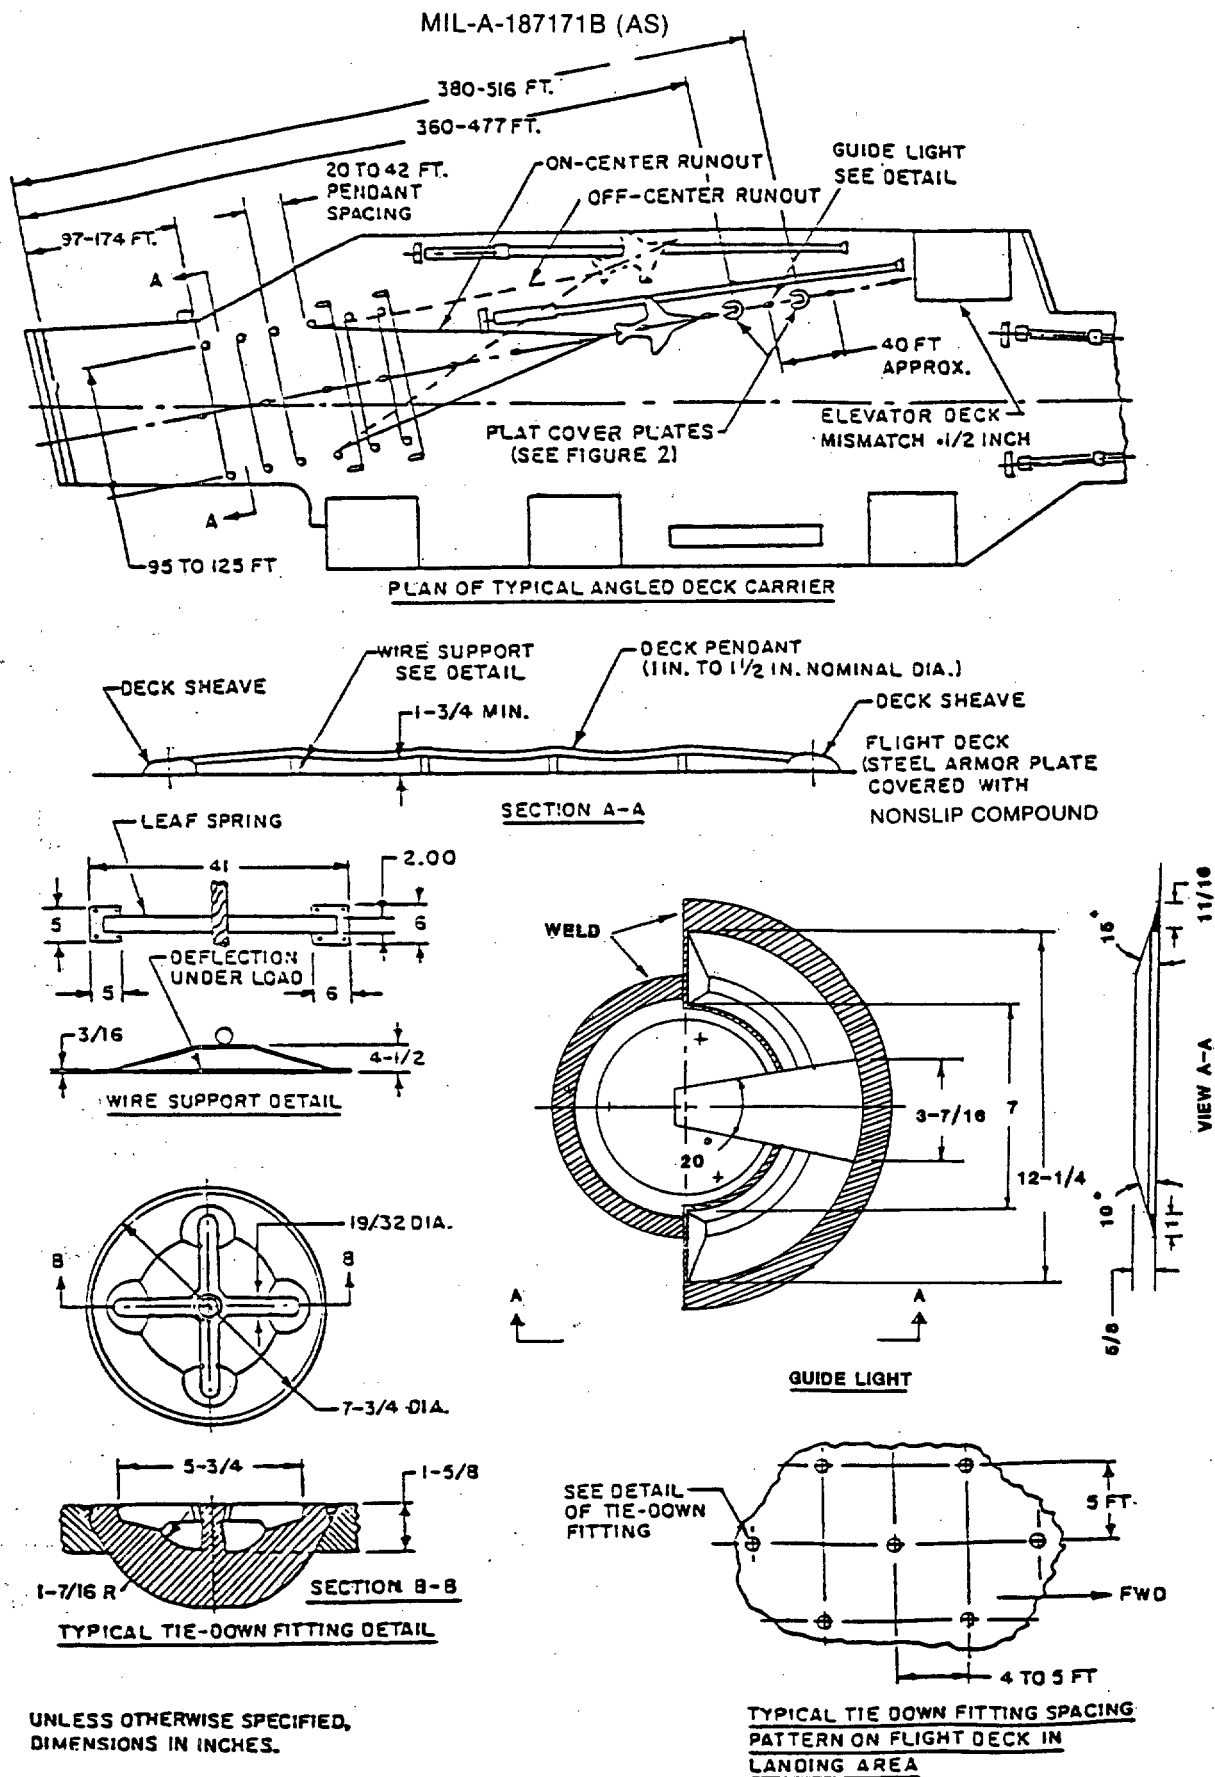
Typical Arrangement and Details of Arrested Landing Deck Area on CV Type Flight Deck
